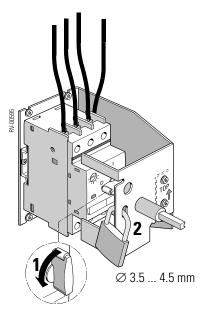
Locking the thru-the-door rotary operator (example: frame size S0)
